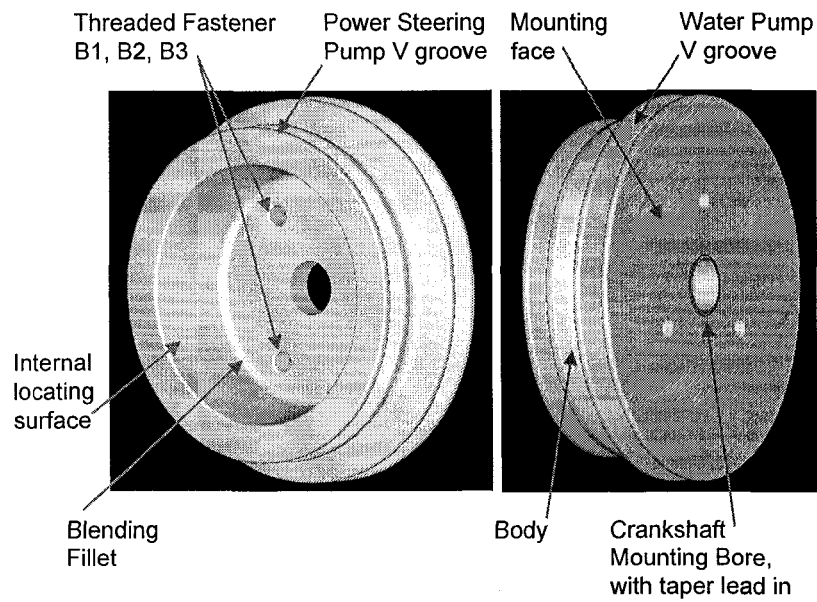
New Pulley to Drive the Water Pump and Power Steering Pump – CAD model and machined part, and Interfacing Dampener
